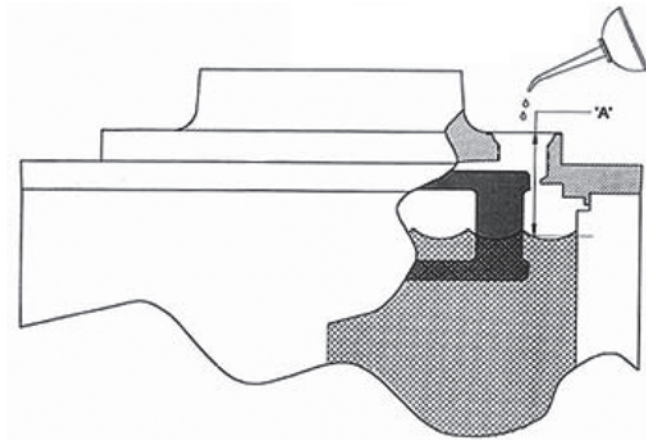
Rotation Gear Box (Qty. 2) Fill Plug and Drain Plug Locations
